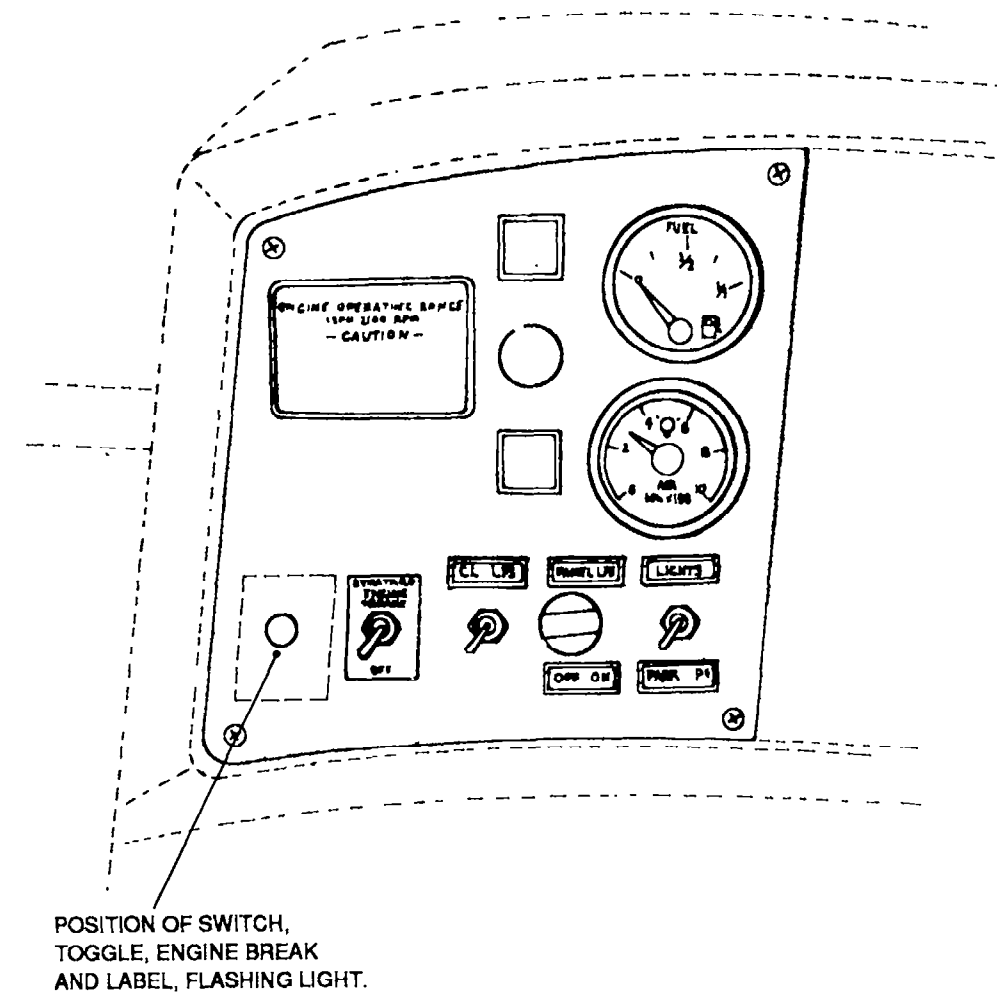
POSITION OF SWITCH, TOGGLE, ENGINE BREAK AND LABEL, FLASHING LIGHT
